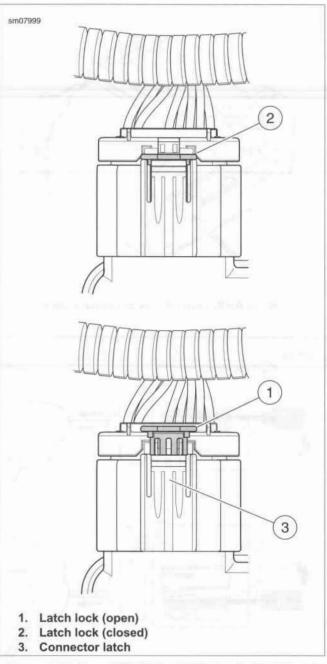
Tyco GET 64 Sealed Connector Latch and Lock
